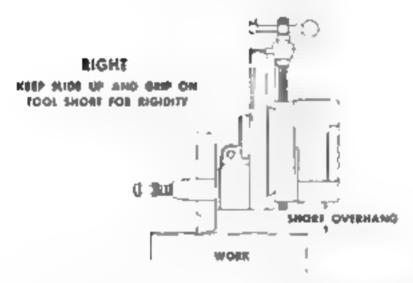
Correct setting of the cutting tool and the clapper box
